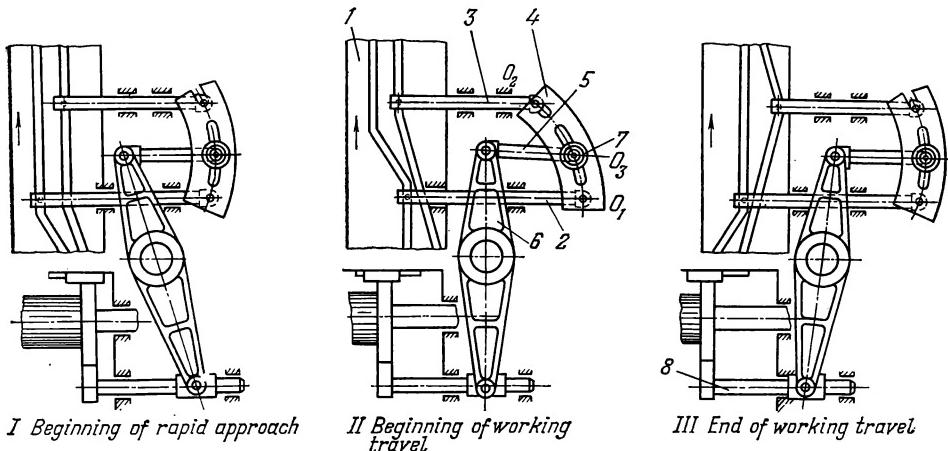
Operation of the end tool slide drive in the model 1265 automatic
